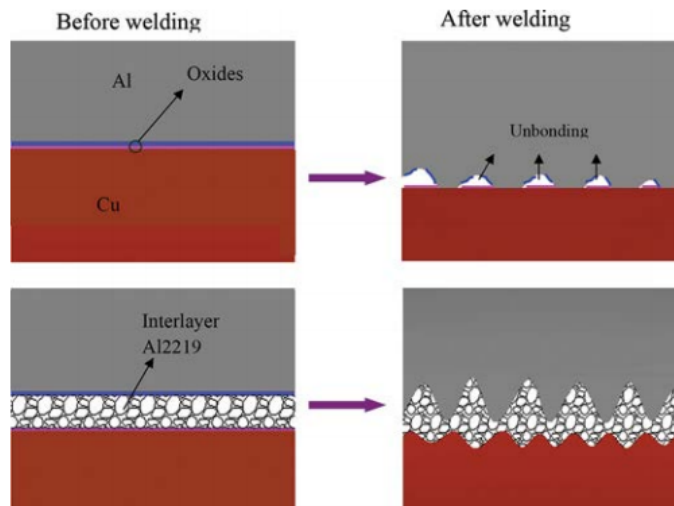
Ultrasonic welding schematic illustration of the bond line[27]
